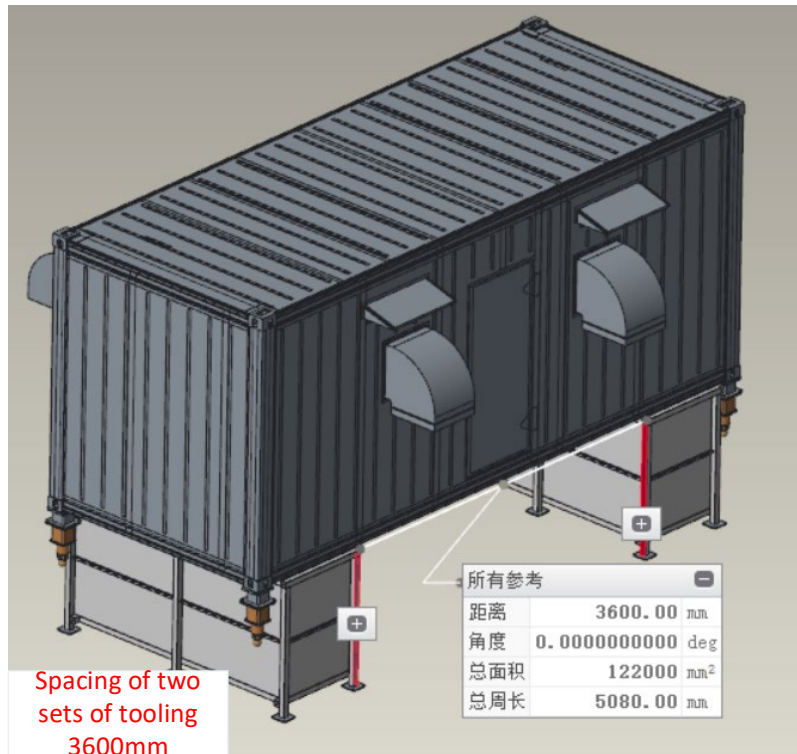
Place the Container on the Mounting Base TU Tooling
